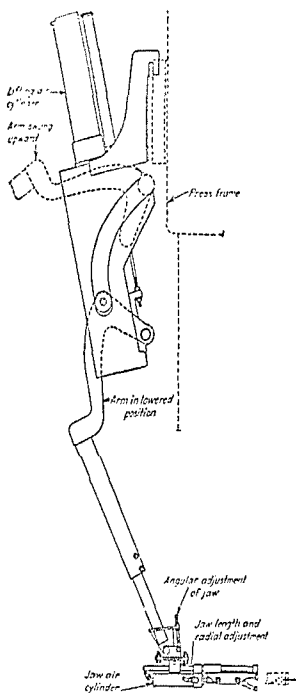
The Iron Hand swinging-arm press-unloading device. (Sahlin Engineering Co.)
